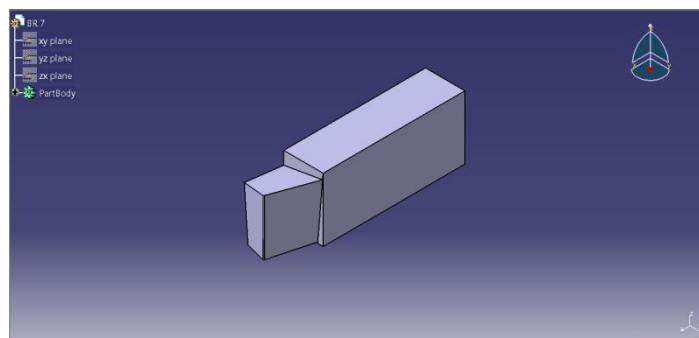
Designed Tool with Back Rake Angle  $7^{\circ}$
